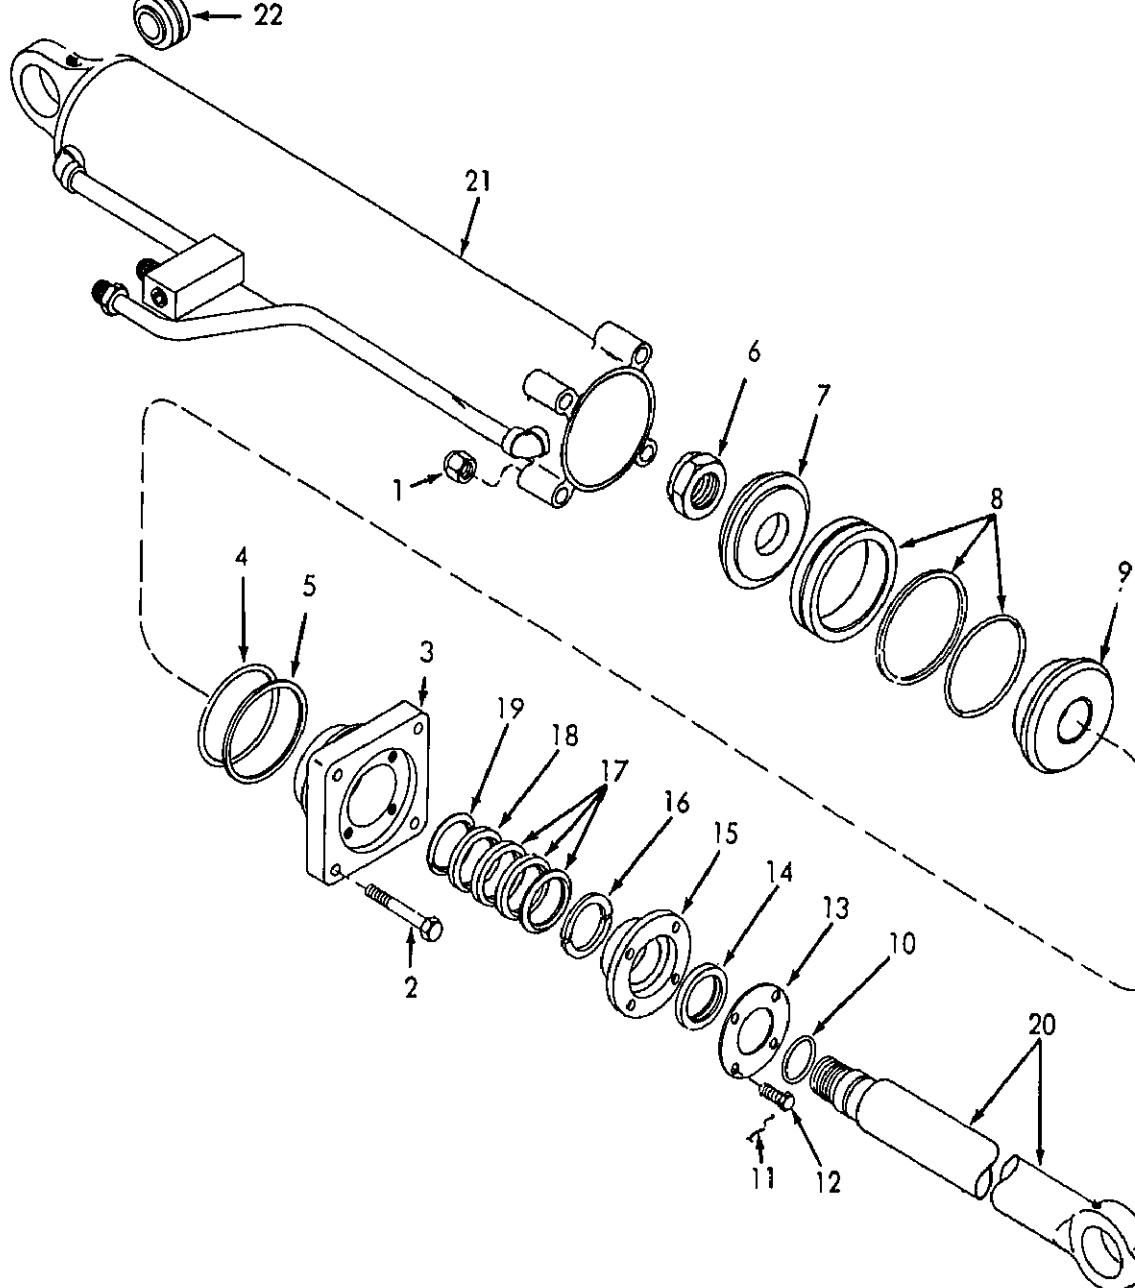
Steering hydraulic cylinder, removal, disassembly, reassembly and installation (sheet 1 of 2).
